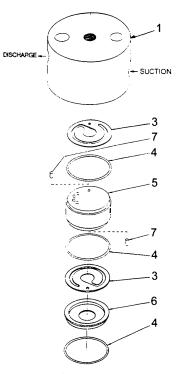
2<sup>nd</sup> Stage Valve Assembly.
